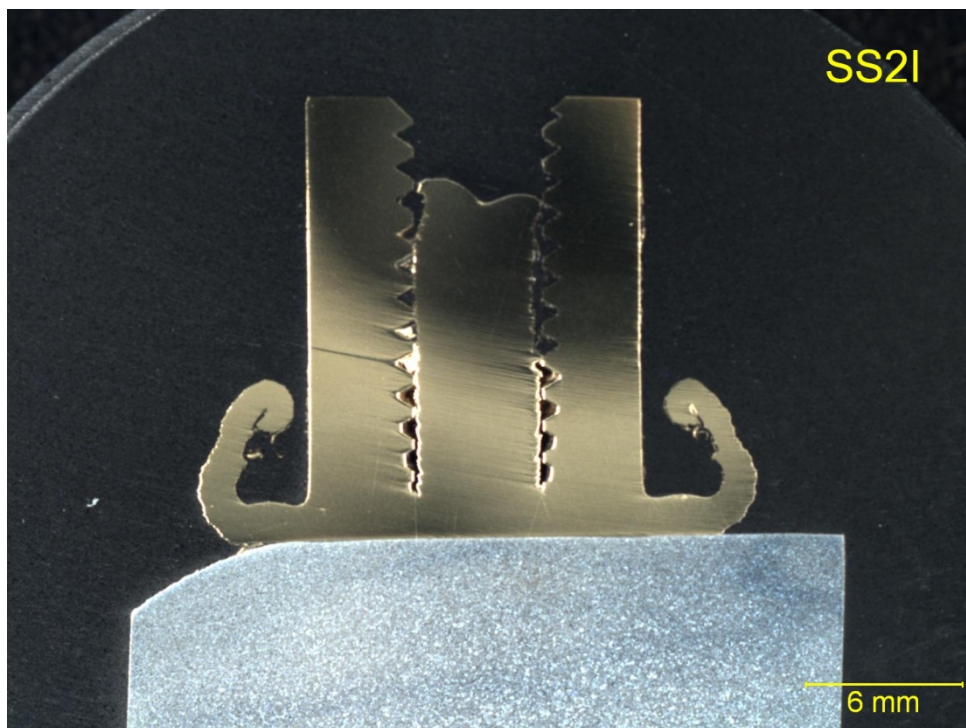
IFW Weld Joint Standard Chemistry Rail #2
